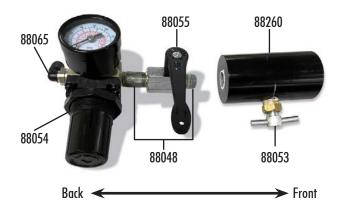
The assembly from front to back is as follows. 88260, 88053, 88048, 88055, 88048, 88054, and 88065.
